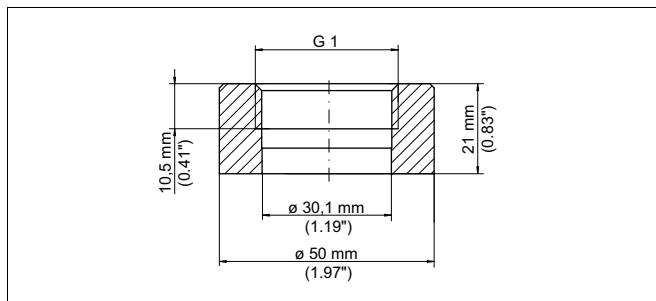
Dimensions welded socket G1 B acc. to ISO 228-1
